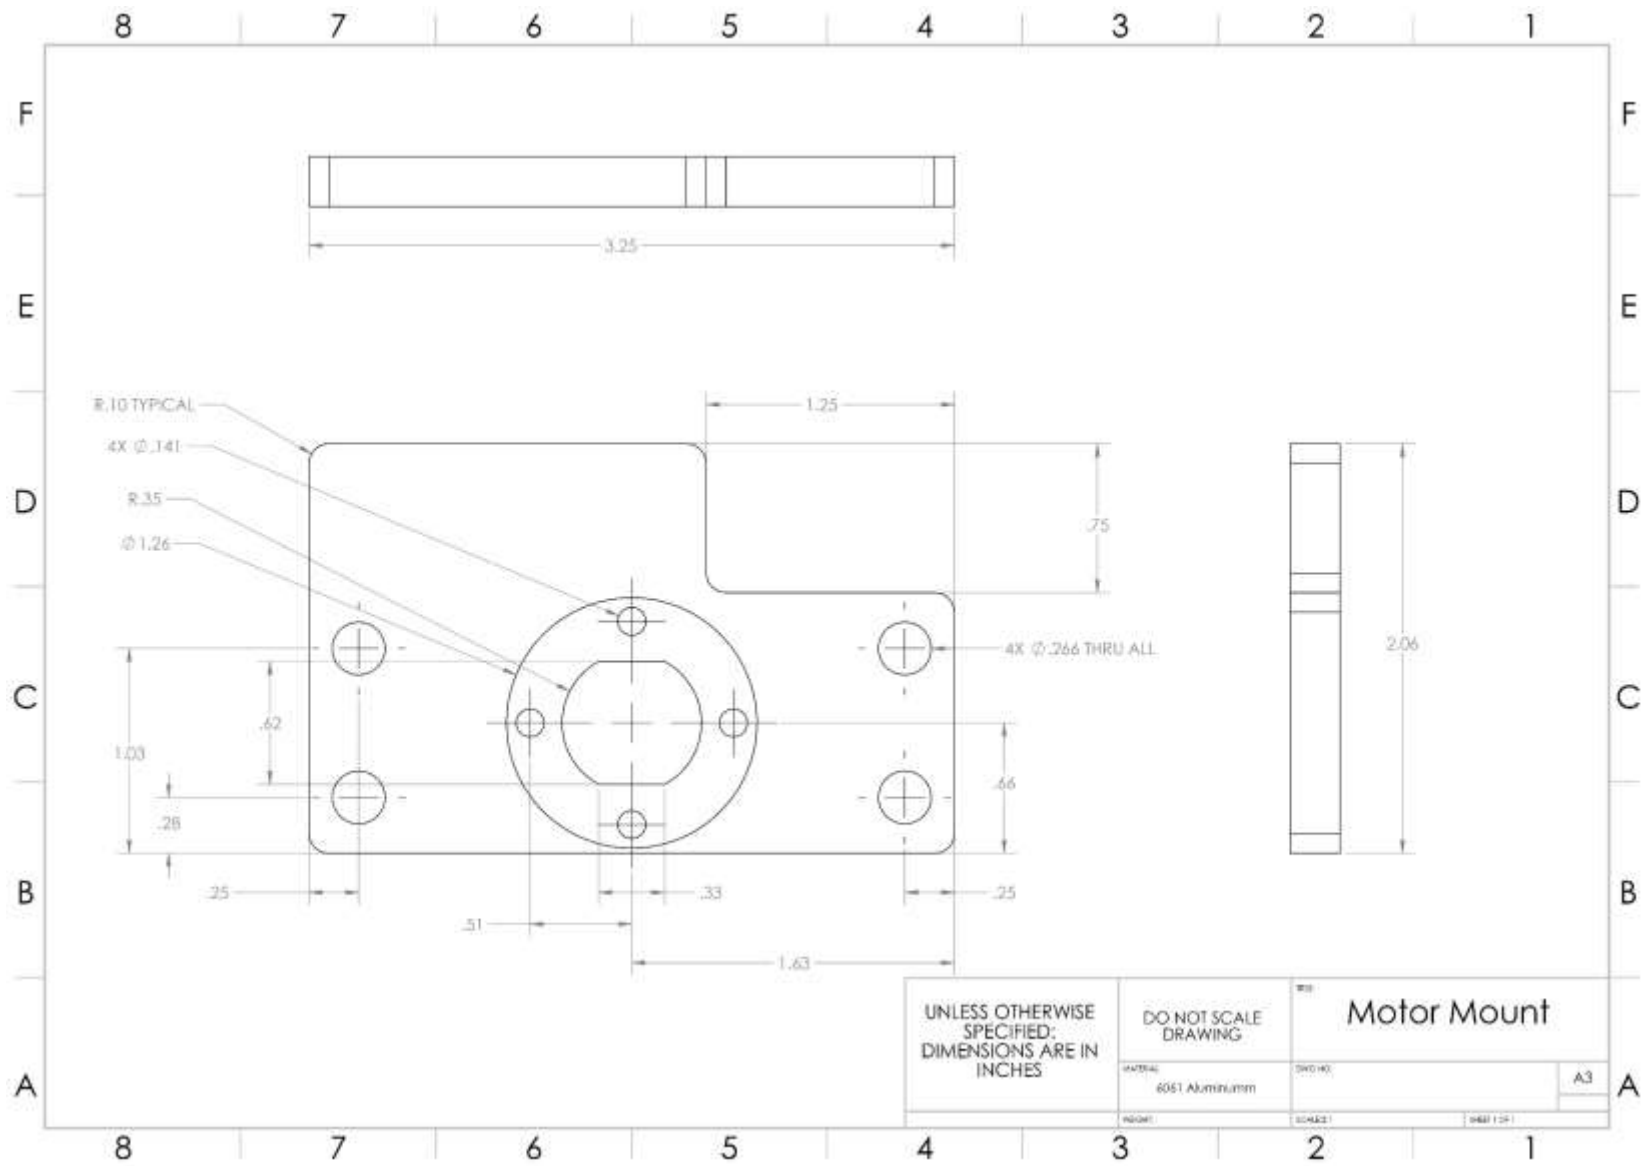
12. Mechanical Drawing of Motor Mount.
